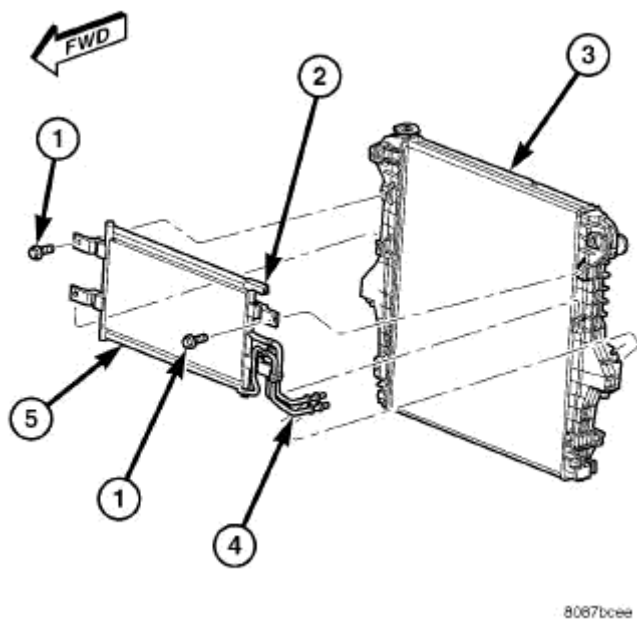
A/C Compressor/Transmission Combination Cooler, Lines, Bolts & Brackets
